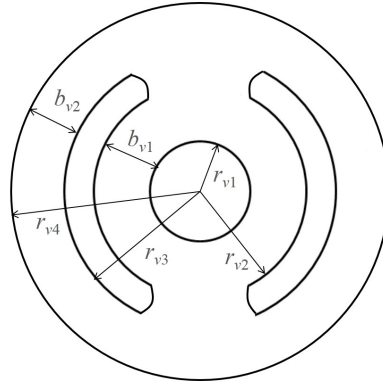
Key valve plate dimensions for a axial piston pump.
